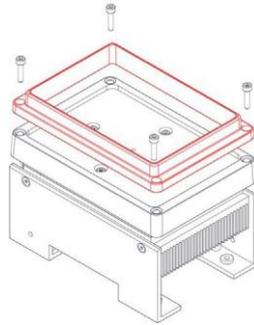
Unscrew the 4 screws at the corner and remove mounting frame.
